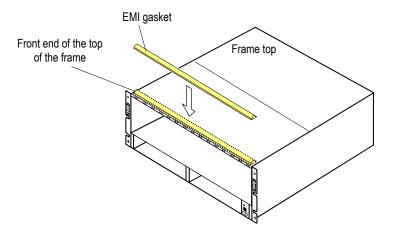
Position for Sticking EMI Gasket (Basic Chassis)
